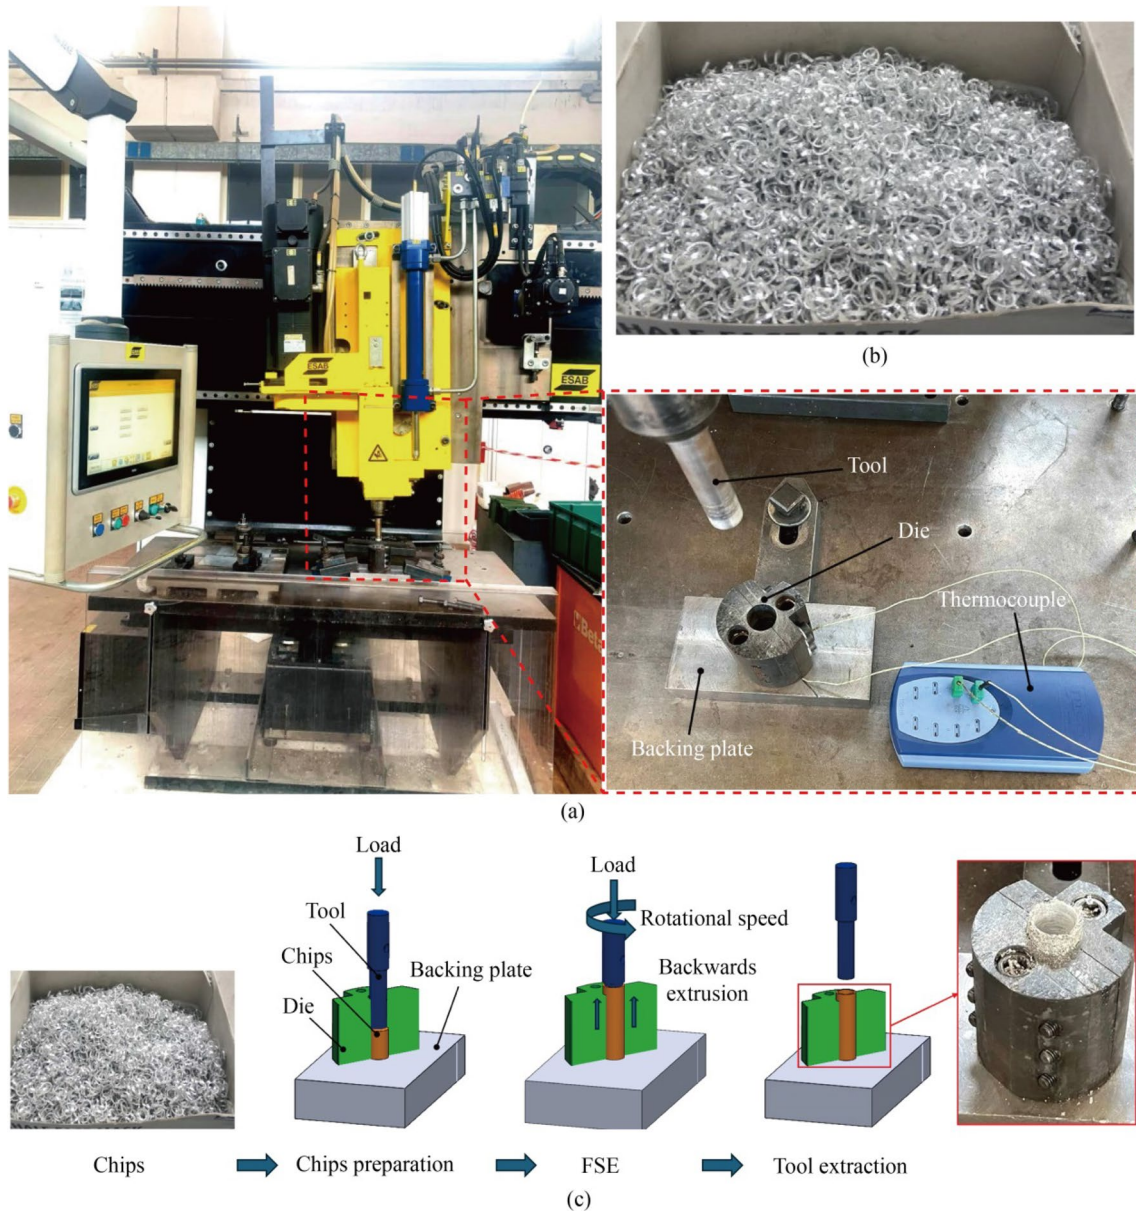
a Esab Legio machine for FSE tube extrusion, b aluminium chips used for the experimental campaign, c schematic diagram of the process
